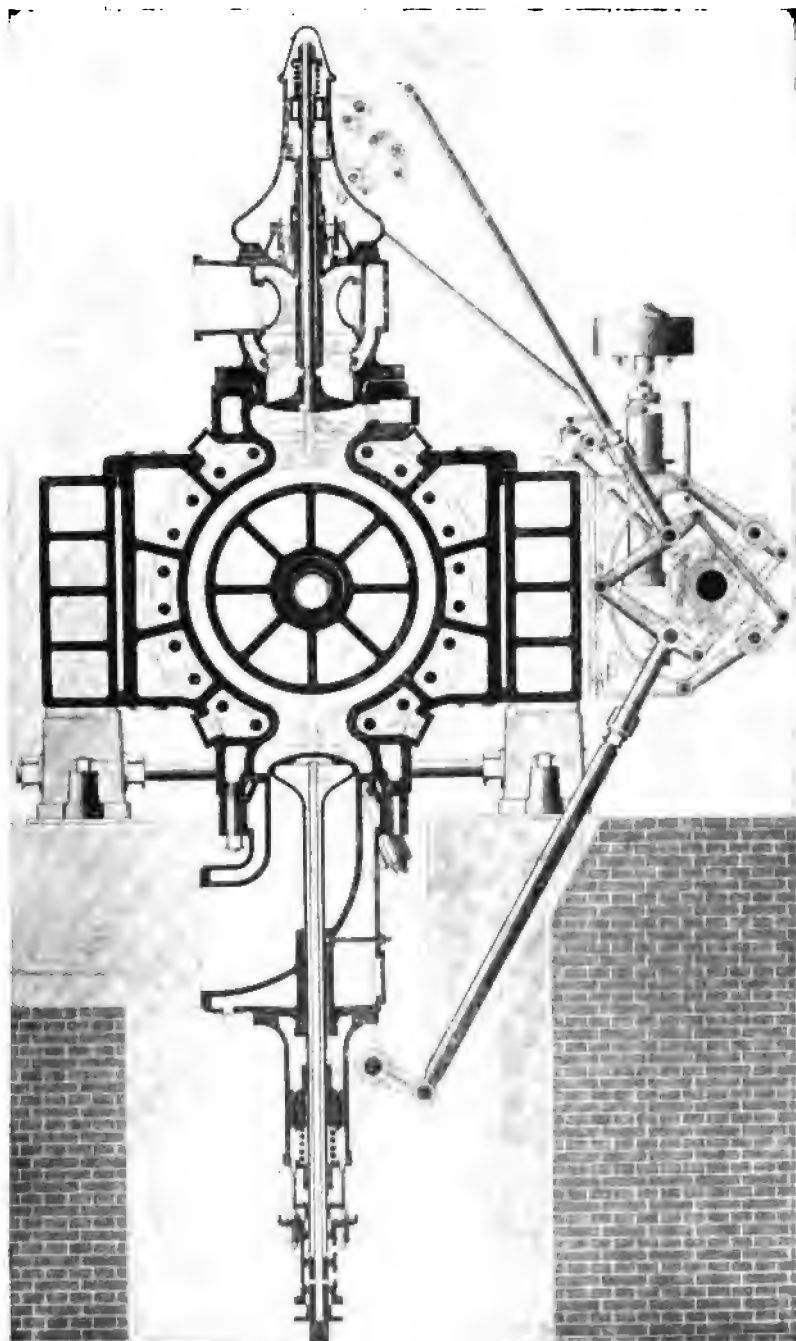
SPECIAL VALVE ARRANGEMENT OF THE COCKERILL ENGINE.
